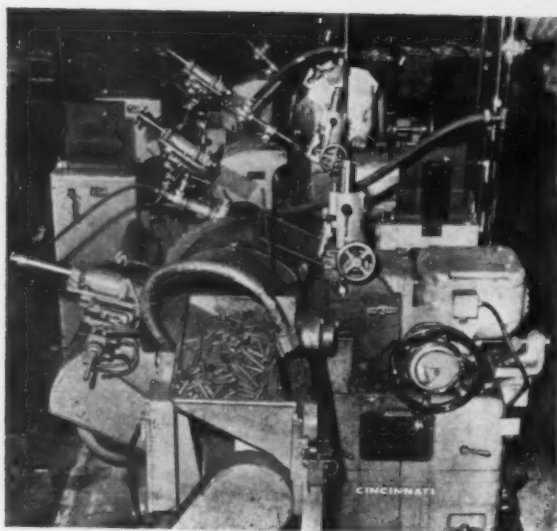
Centerless grinders with automatic feed hopper and advance remove 0.065 in. of metal from outside diameter of 18,000 cast iron valve guide bushing blanks in 8 hr.
